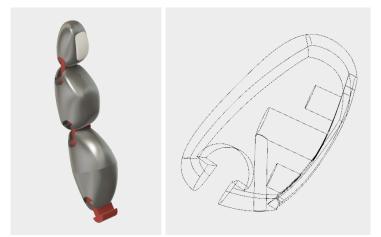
Left: CAD model of the whole finger, with joints and flexible top part. Right: Wire frame of the top component of the finger, with holes for the wire and flexible part.
